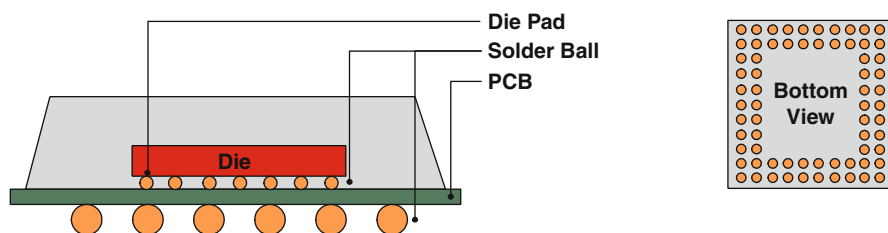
Cross-section of ball grid array with flip-chip package
